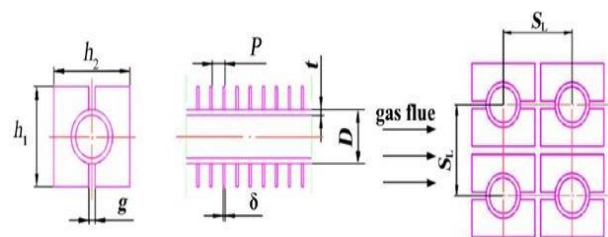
Geometric schematic of H-type finned tube and tube ban.
